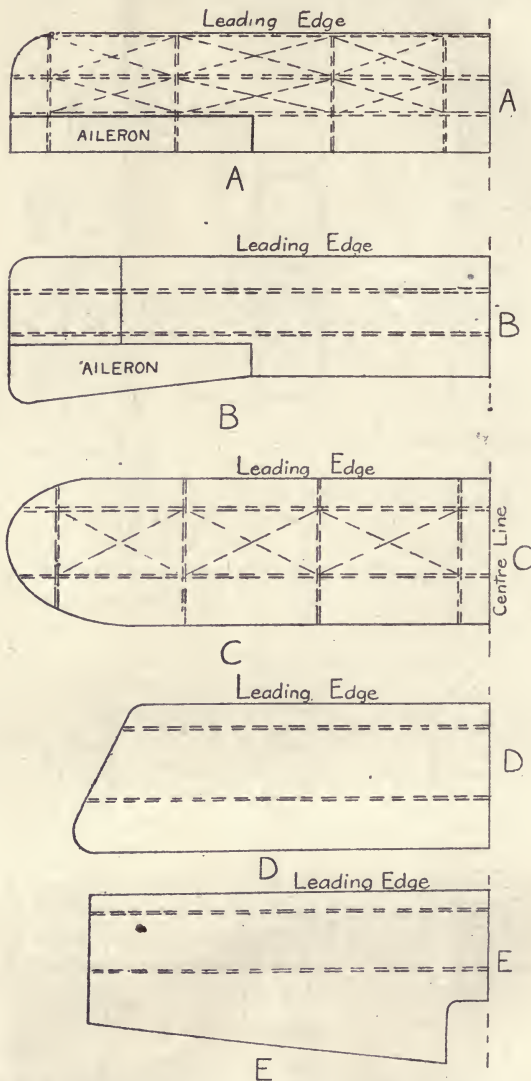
SOME TYPICAL WING PLAN FORMS.
